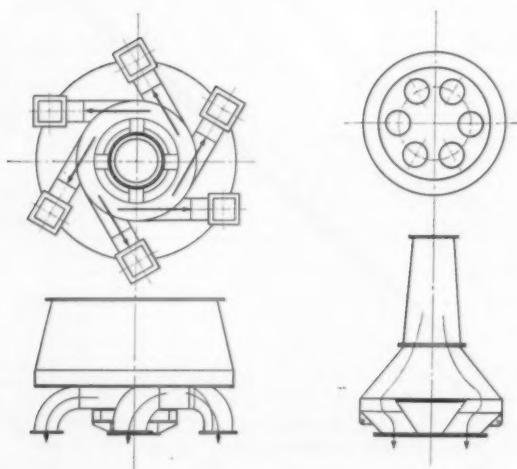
Pulverized coal distributor, left hand: half-pressure mill; right hand: full pressure mill
